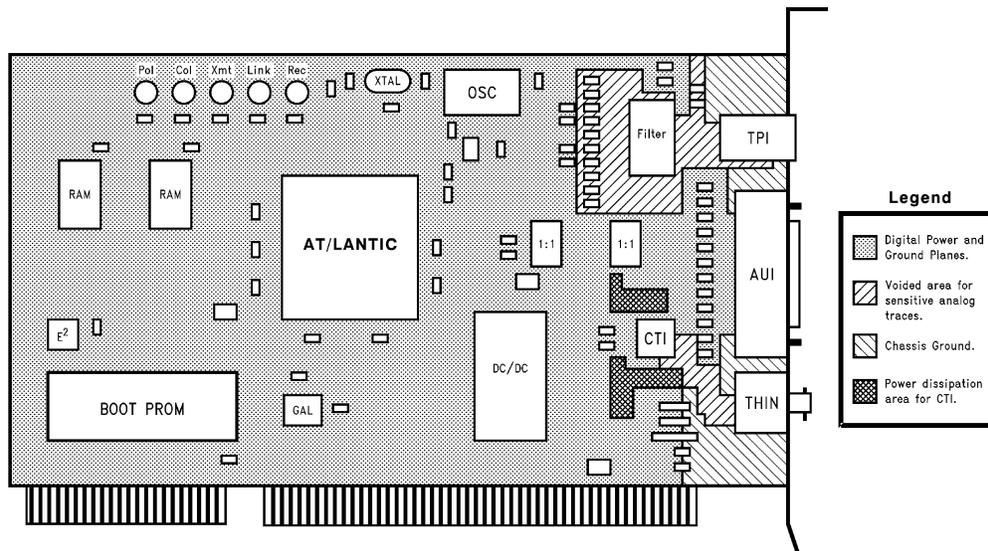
DP83905EB-AT Board Layout and Component Placement
